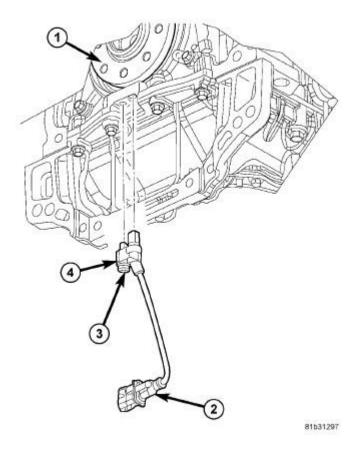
Crankshaft Position Sensor Courtesy of CHRYSLER LLC
